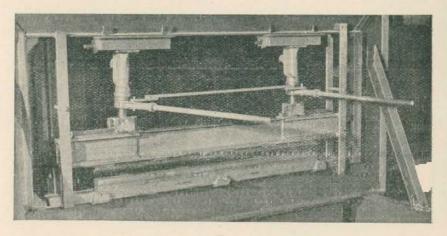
Cold-Forming Press for Preparing Long Test-Specimens
